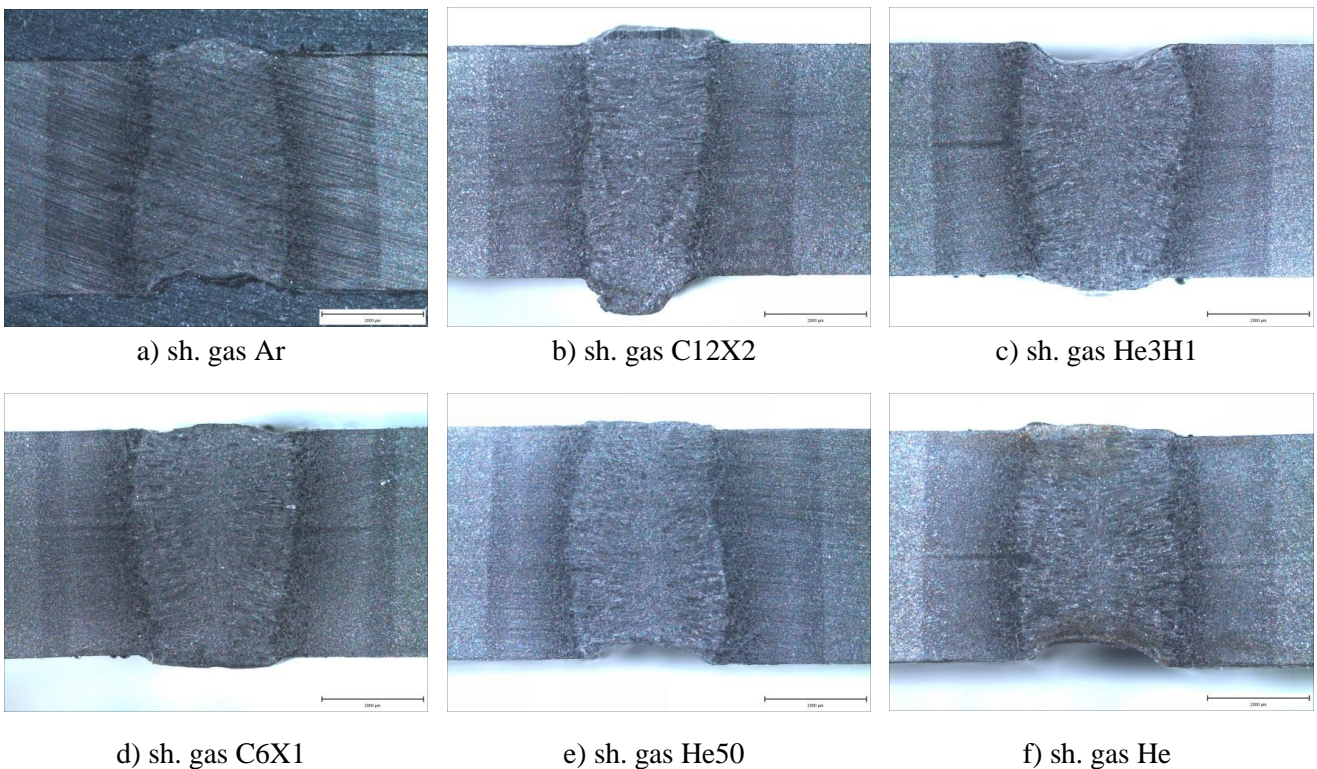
Macrostructure photographs of laser welded joints using different shielding gases; ground sides are at the bottom of the welds.
